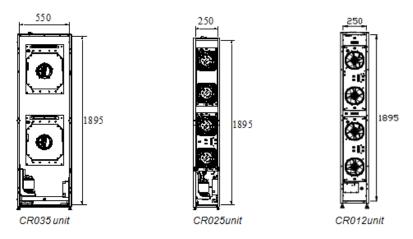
Front air outlet locations & dimensions (unit: mm)
